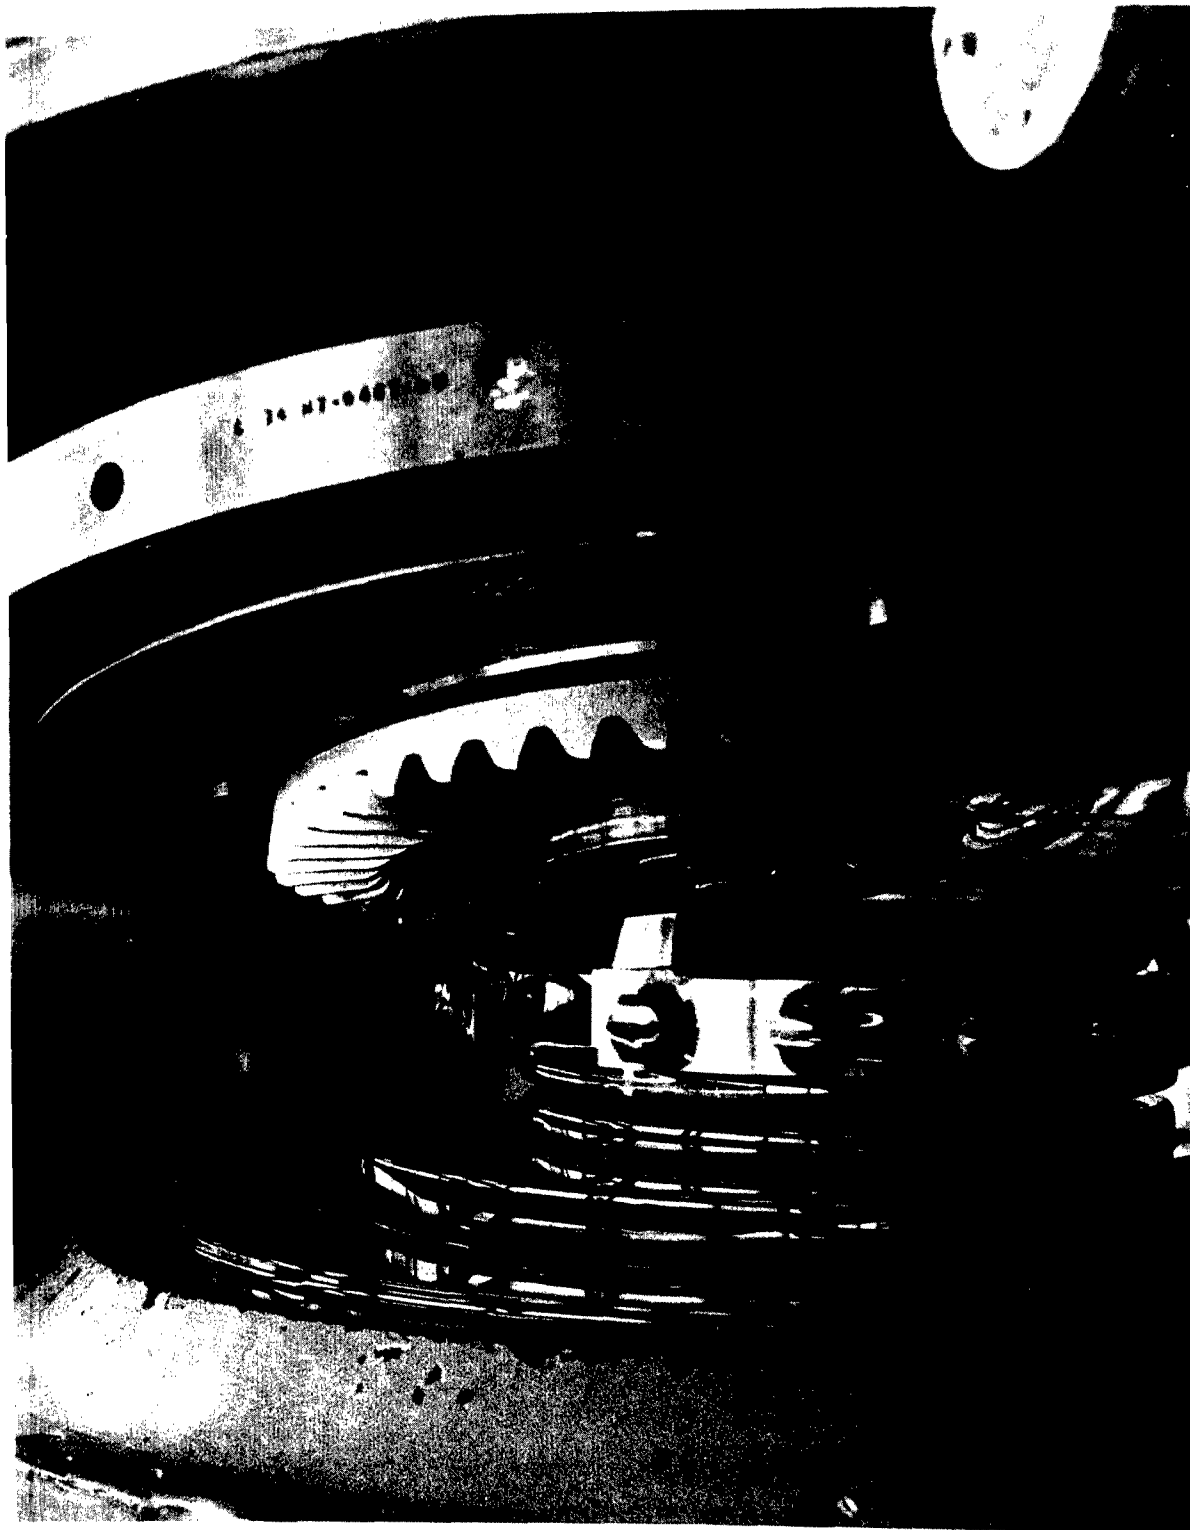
Forged Gear (From the Second Series of Forging Trials) With Teeth Being Finish Machined on a Gleason Gear Generator
